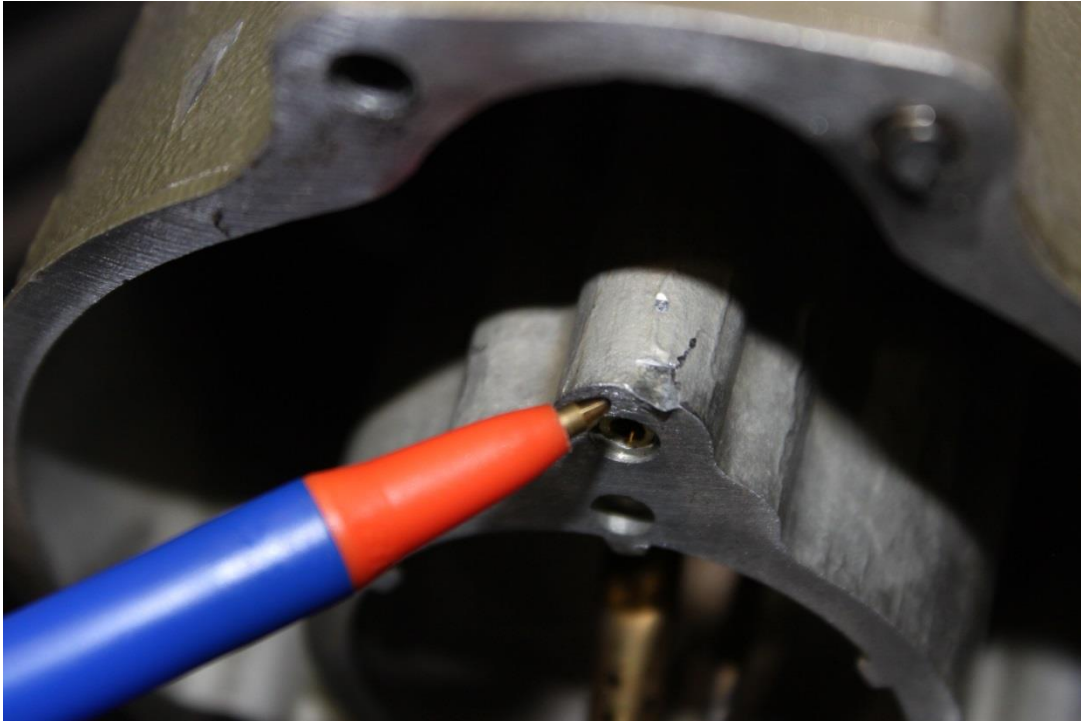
Impact damage to Interior of Carburetor Bowl Assembly
